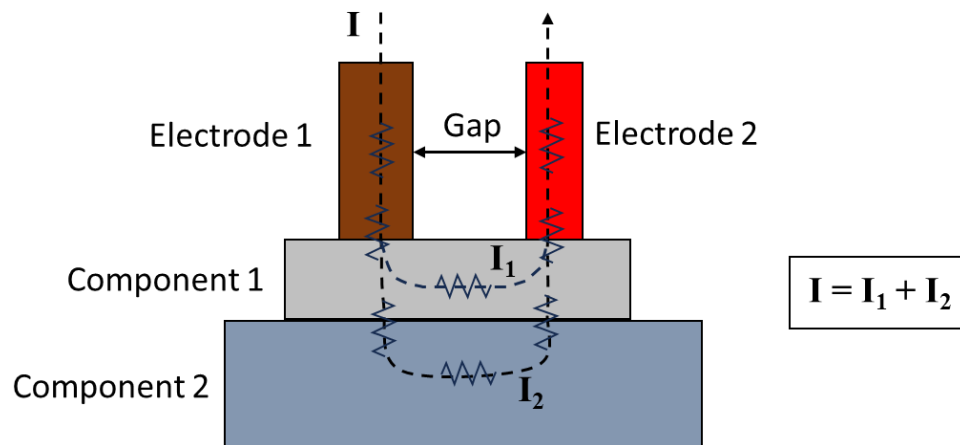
Schematic shows layout of parallel gap resistance welding with two parallel electrodes. The two electrodes can be of different materials, cross-section, have different welding force, and polarity (for DC welding). Materials being welded can also be different in terms of thickness, material, and overall dimension. Squiggly lines denote different resistances to current flow including bulk and contact resistance.
